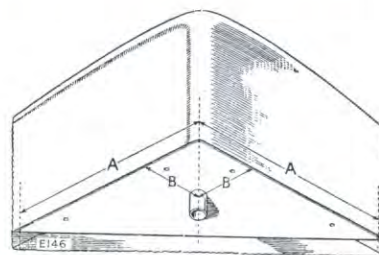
Fitting corner plate to bottom front corners of seat cushion.
